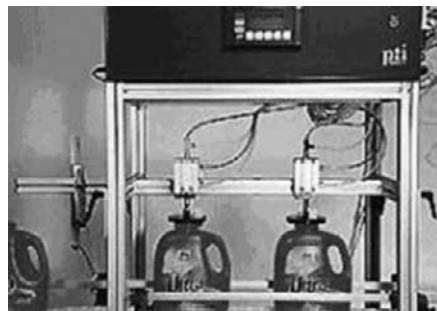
Container inspection systems using pressurised air to detect holes or weak spots in blow moulded containers
